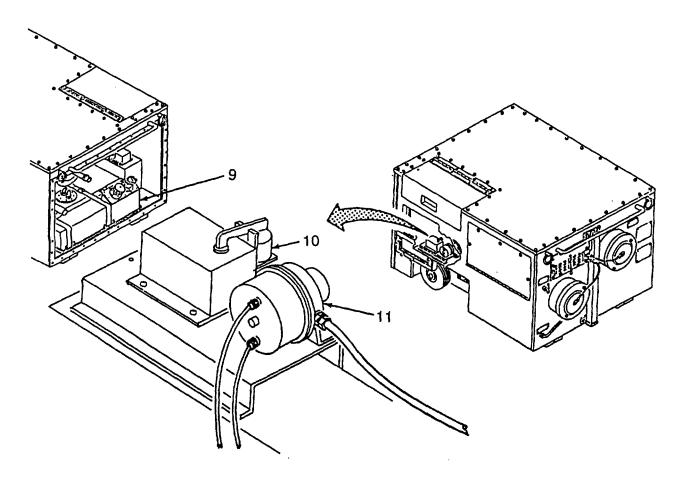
Heater Interior (Sheet 3 of 3) 1-10
